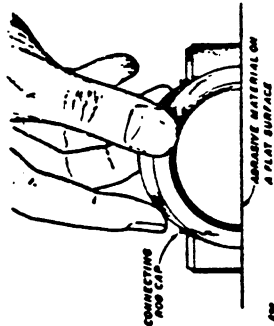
REDUCING CONNECTING ROD CLEARANCE
